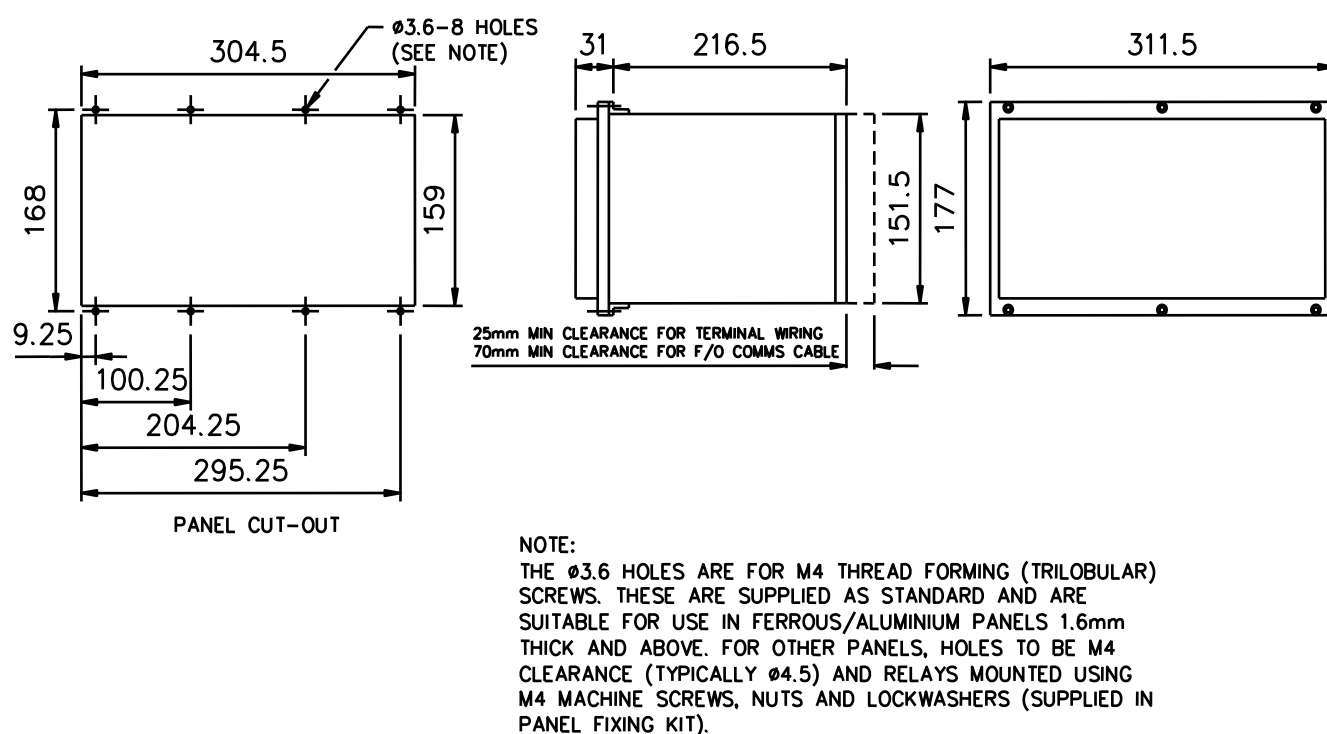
Overall Dimensions and panel drilling for Epsilon E12 case
